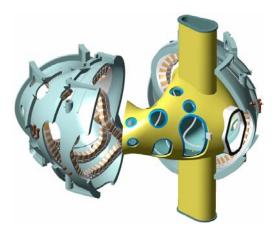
Modular coils being assembled over vacuum vessel sub-assembly
